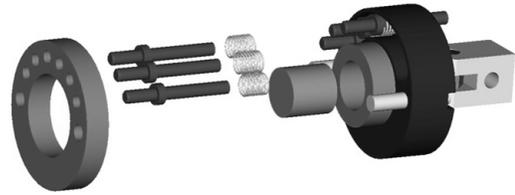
Exploded view of the spring loaded magnetic contact connectors.
